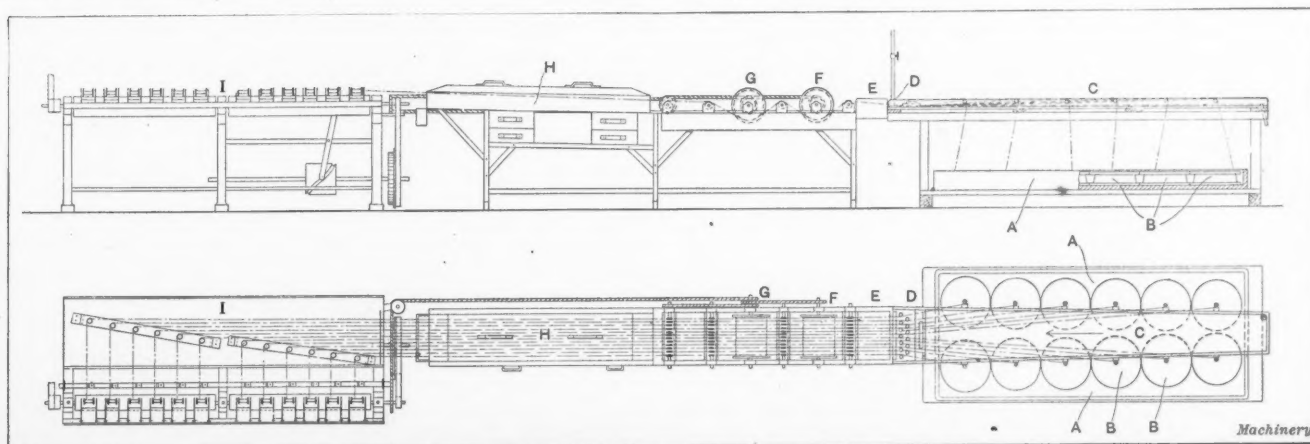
Plan and Elevation of Equipment for treating the Drawn Wire
